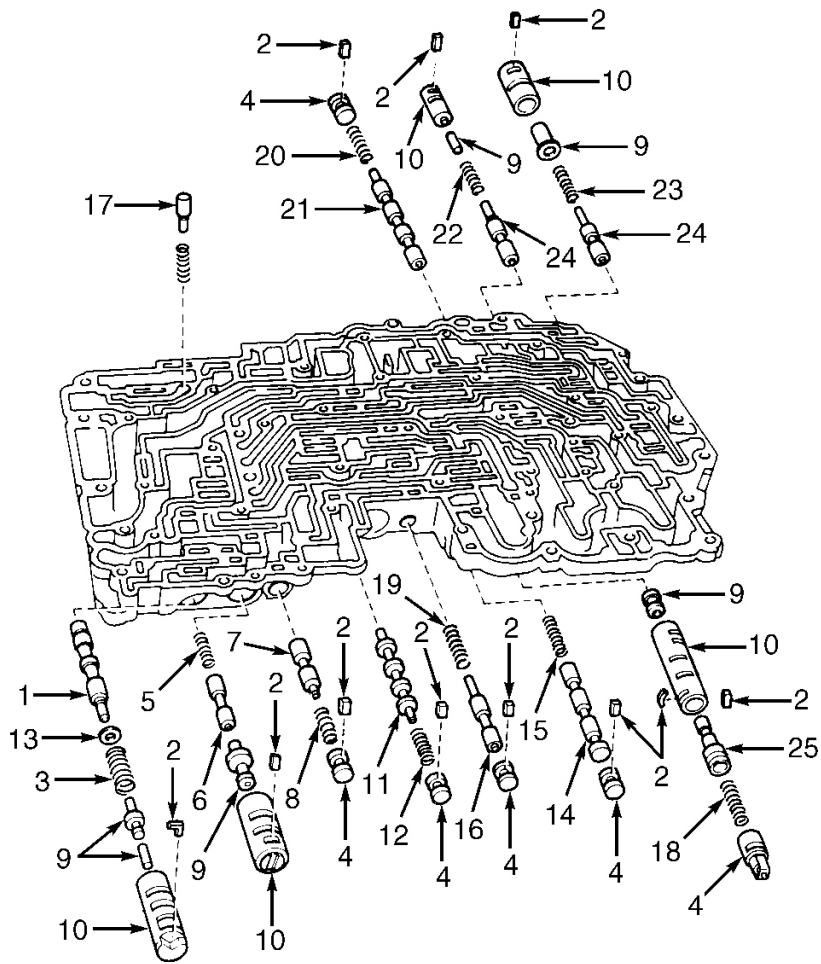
Exploded View Of Lower Valve Body (A-340 Series)
